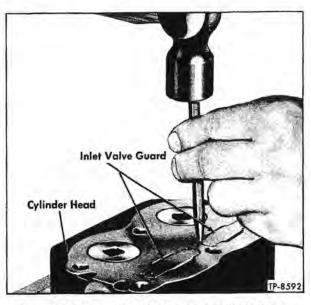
Staking Inlet Valve Guard in Cylinder Head
